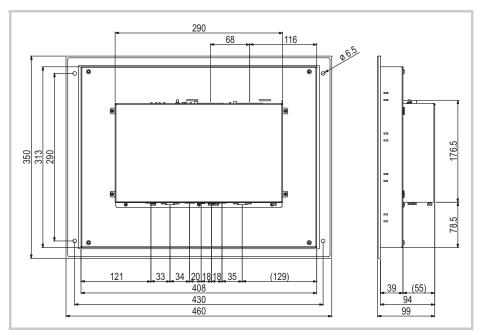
Mechanical dimensions of the 15" devices with 4-hole front in  $\mbox{mm}$
